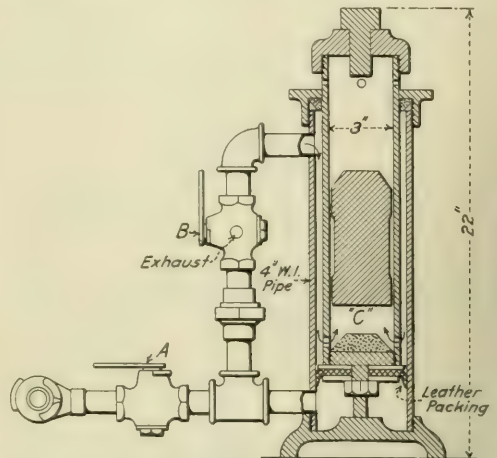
Pneumatic Hammer for Removing Frame Bolts. ceive the lever, which also has teeth filed on a circular end. The swinging part and the end of the lever which engages the stud are case hardened. The ease with which this tool can
